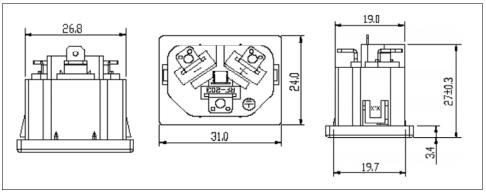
Dimensions of the Rong-Feng RF-203P outlet
